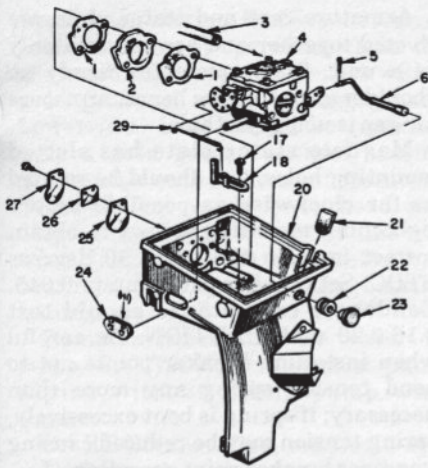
Exploded view of XLA115-1 generator engine air box assembly. Mechanical governor parts are shown in exploded view of generator in Fig. HL70.
